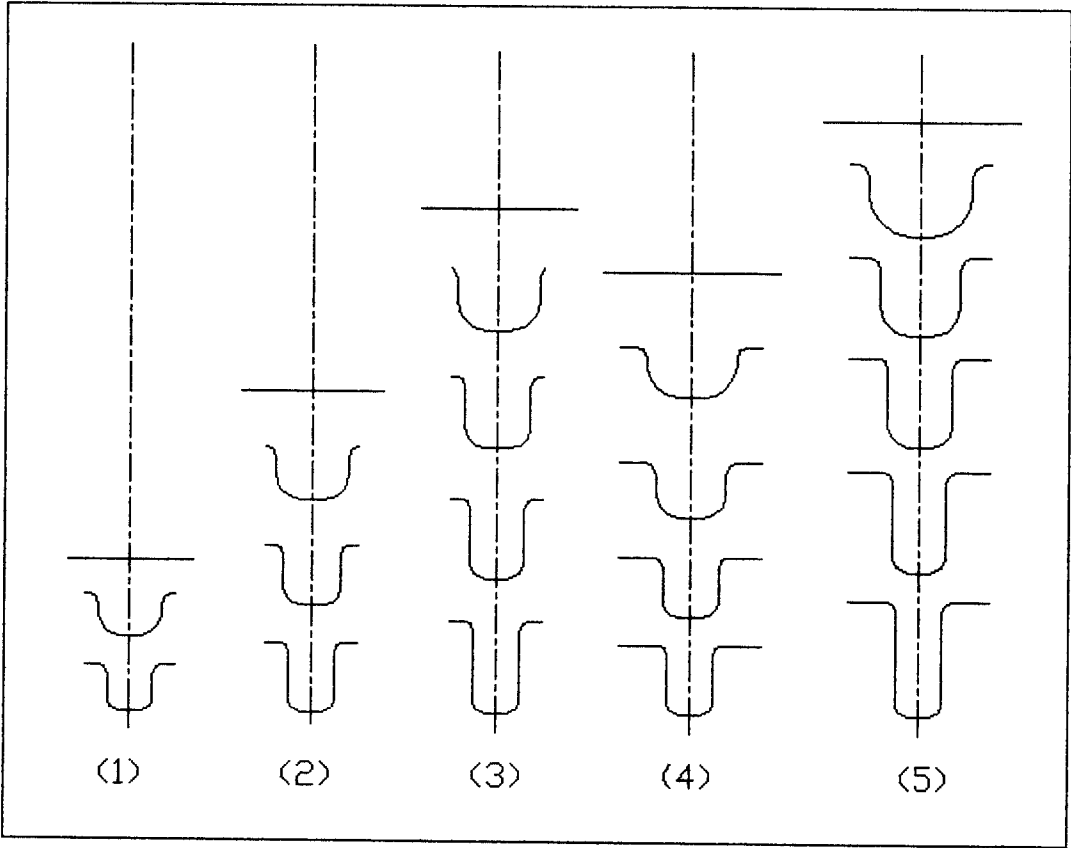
Process Outlines of Deep Drawing ($T=1 \text{ mm}$)
